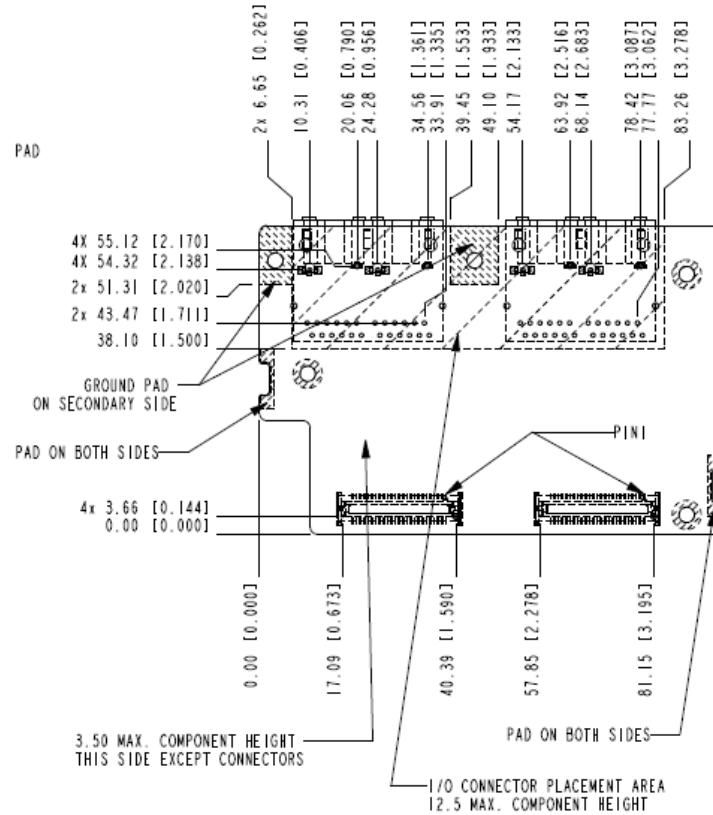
Quad-Port GbE I/O Module Mechanical Drawing
